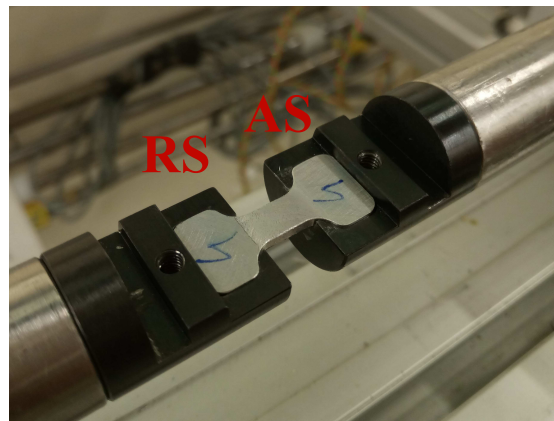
Butt joint specimen with the welding crosswise and its placement on the grips, positioned with the RS to the incident bar
